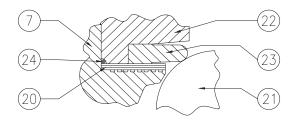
Section view of Heavy Duty Composition (TCM) Ball Seal
